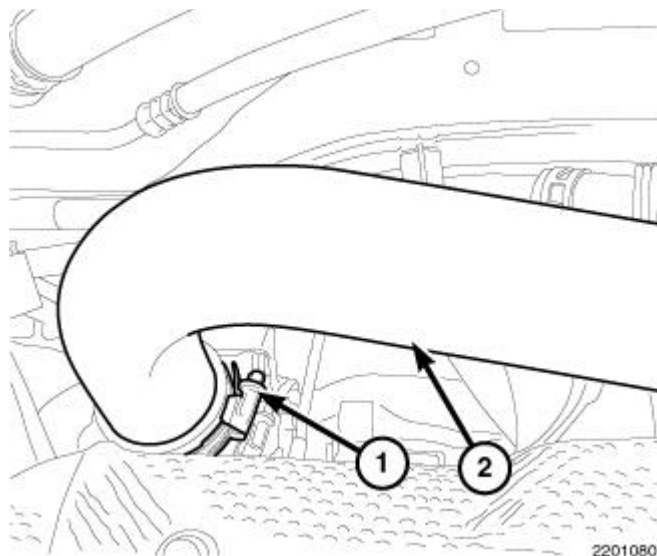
Charge Air Cooler Inlet Hose & Clamp
